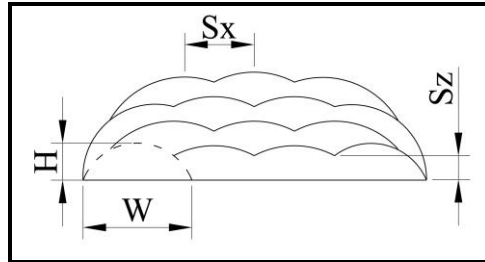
Schematic drawing of the cross section of a deposited specimen
